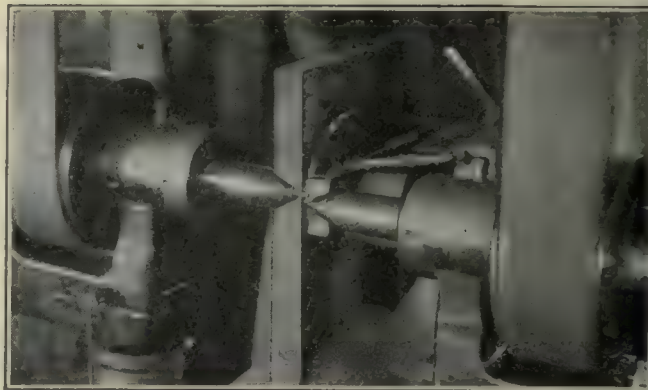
MACHINE THAT MAKES THE STEP CUT
